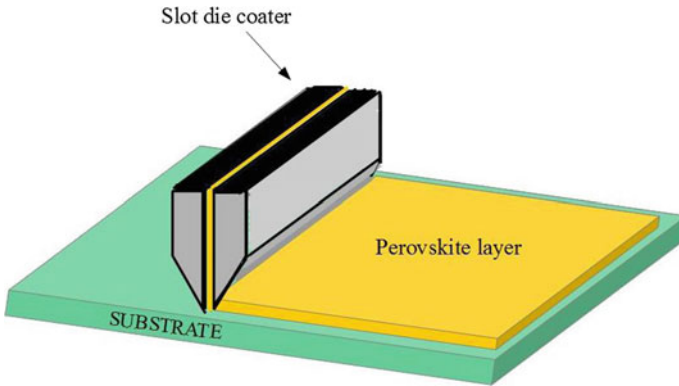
Perovskite layer deposition using slot die coating technique [73]
